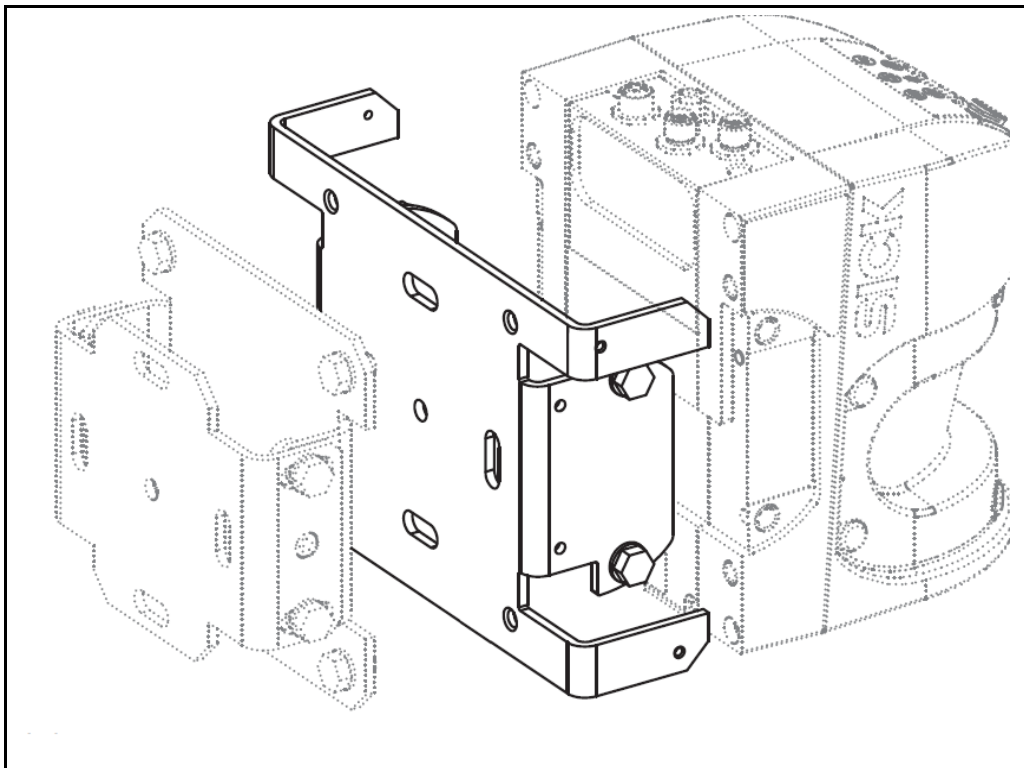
Mounting kit and adapter plate (accessory set 1)
